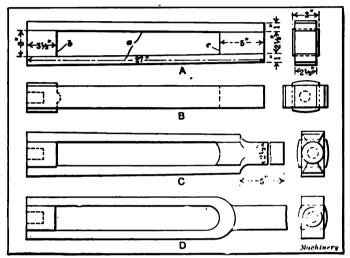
Sequence of Operations performed on the Slot End of the Main Driver-brake Pull Rod shown at E in Fig. 25
